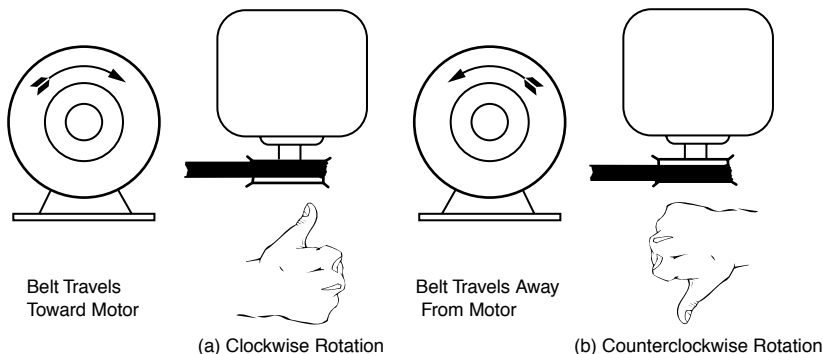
Right-Hand Rule Applicable to "S" Twist
